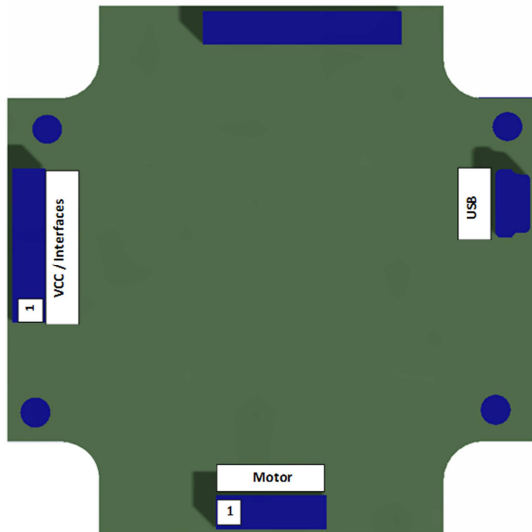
Connectors on PCB of UNIVERSAL motorized capacitor
